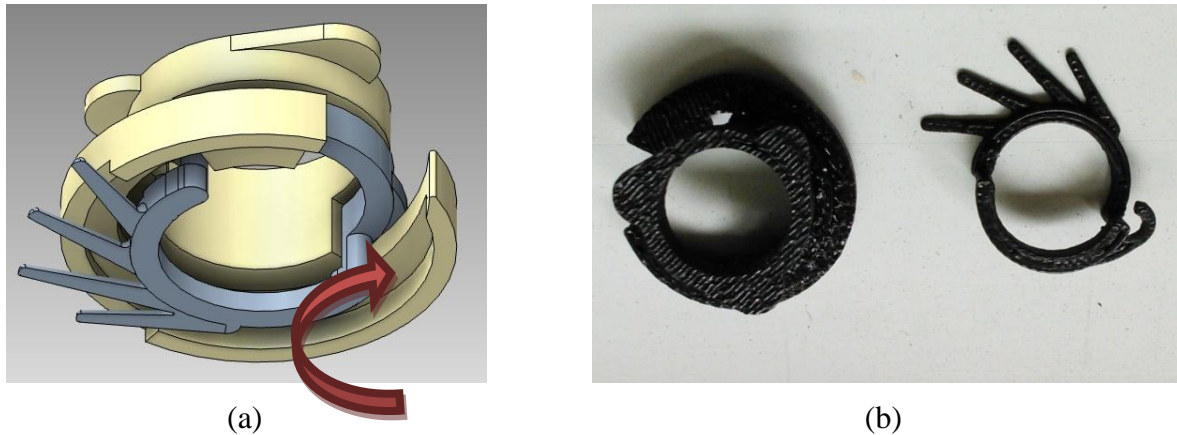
One pin hair removing socket with a single parting direction: (a) The designed model, (b) The printed model
